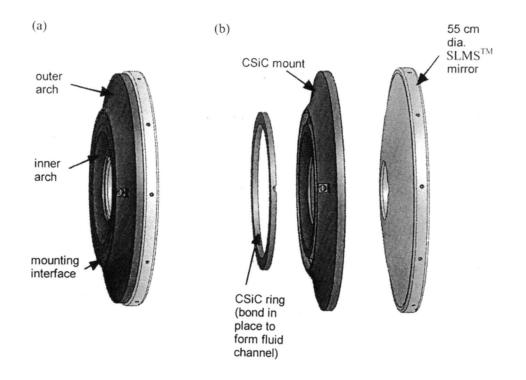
Lightweight silicon foam core mirror of double-arch configuration. (a) Complete assembly, and (b) three components that are bonded together to create the mirror assembly. (From Goodman and Jacoby.⁵⁷)
